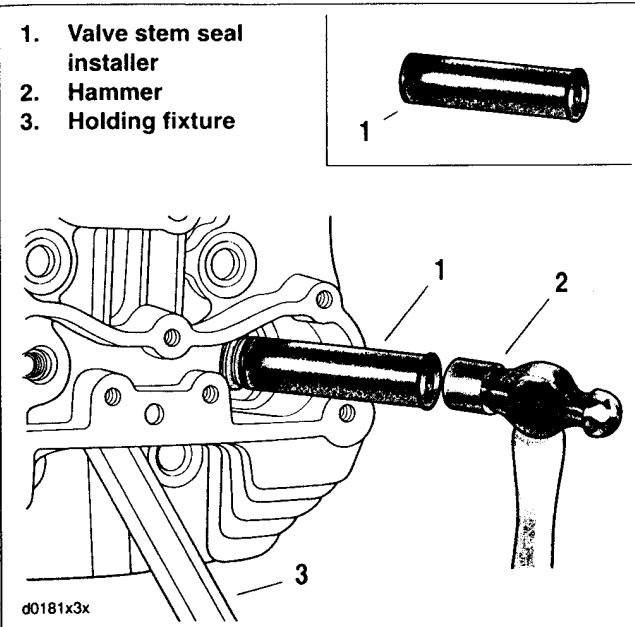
Tap Installer (Part No. HD-34643-A)
